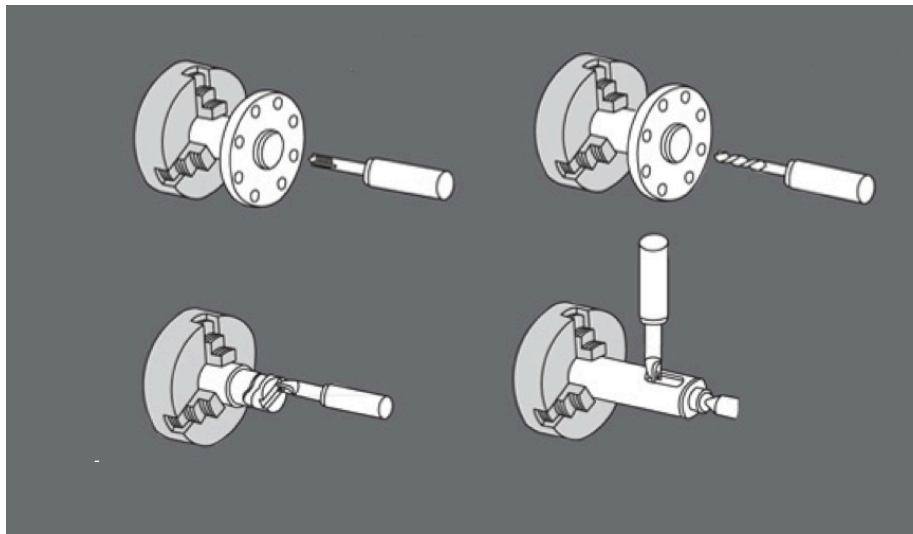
Milling operations on turn-mill machines (CubicMachinery, 2013)
